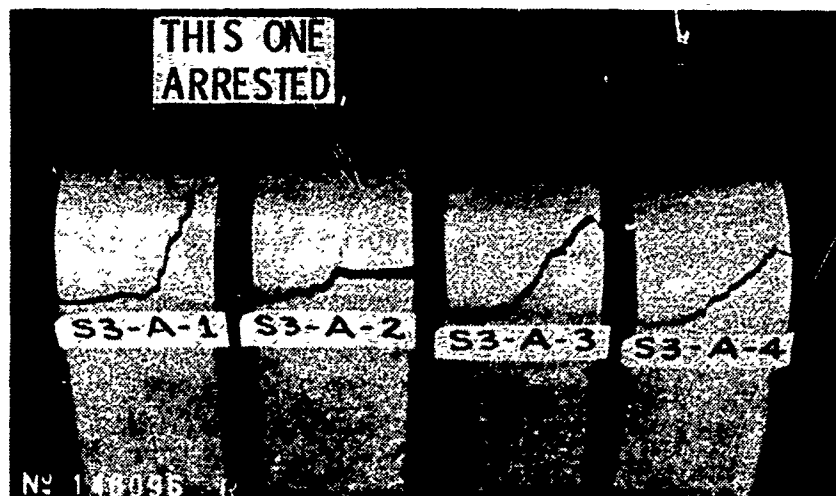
Crack Curving and Secondary Cracks in Specimens S3-A-1 through -4
